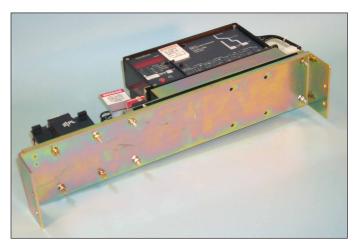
CPT Secured to the Trip Unit / Aux. CT Module Assembly Mounting Bracket.
